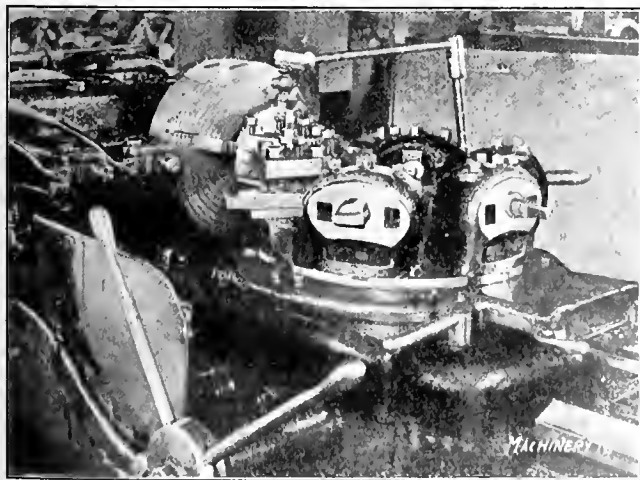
Second Operation on the Flat Turret Lathe, using Special Jaws
